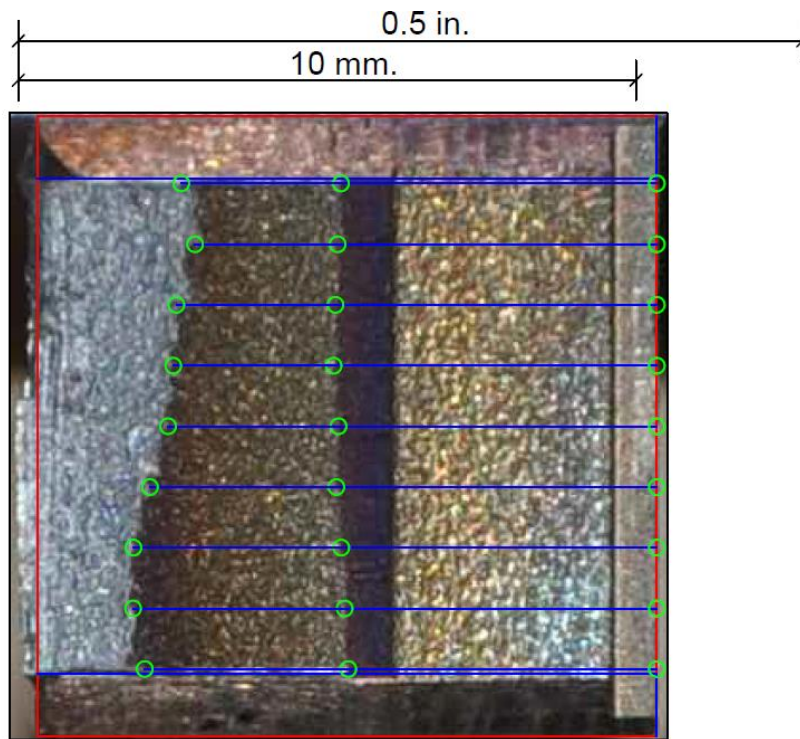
Specimen C2' Fracture Surface
